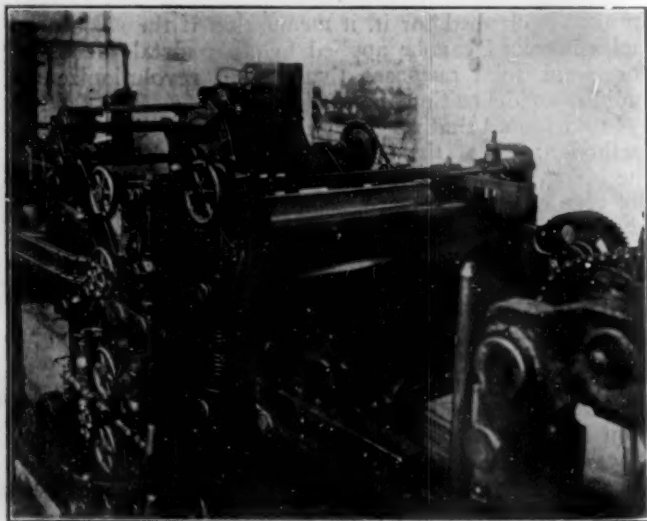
THE COATING ROLLS, SHOWING PARALLEL ADJUSTING GEARS.
